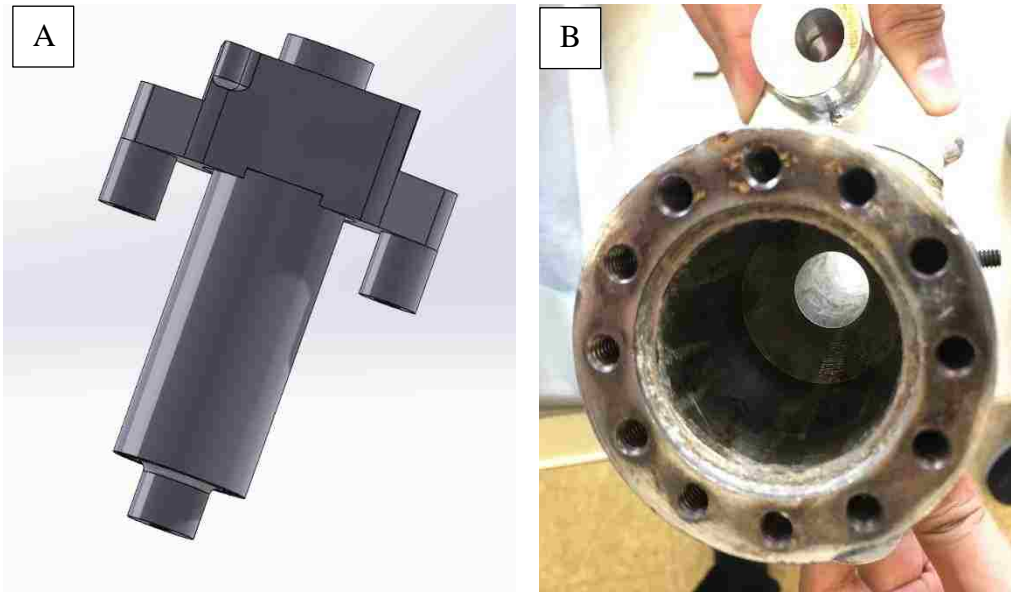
A) A schematic diagram of the extruder body. B) A picture showing the inside of the extruder body.
